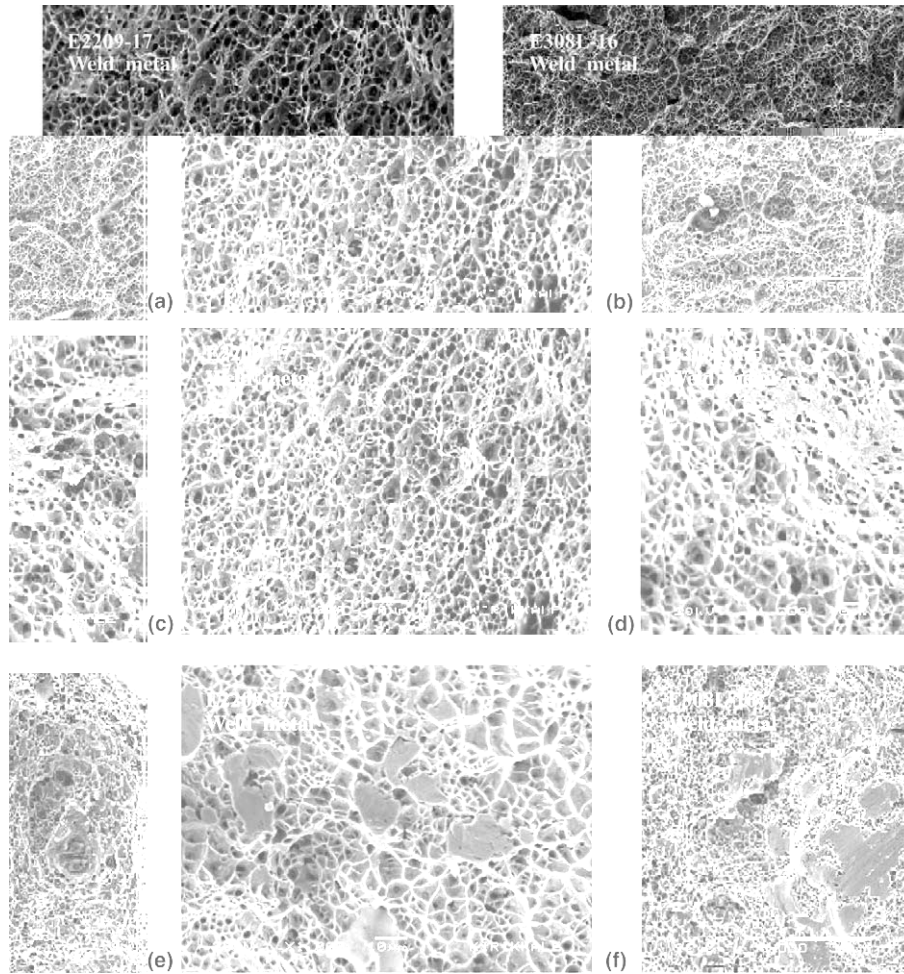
(a–f) Fracture surface of the Charpy impact test sample.
